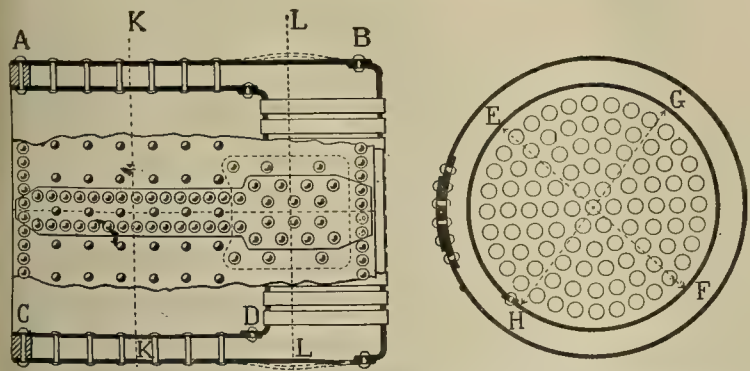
SHOWING THE CONSTRUCTION OF THE EXPERIMENTAL BOILER.
